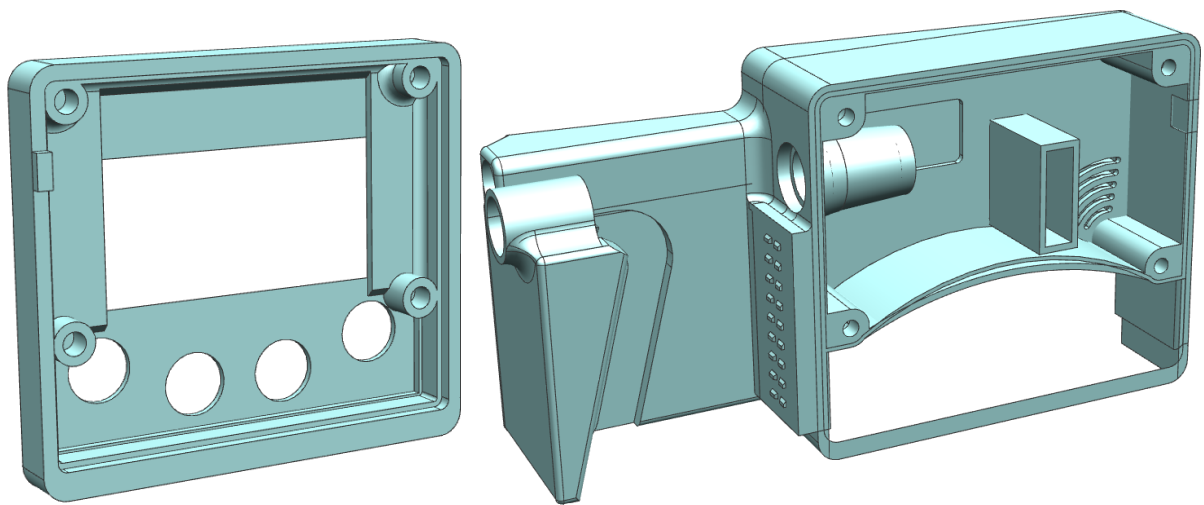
Front (left) and back (right) shells of the enclosure showing mounting posts for M2 brass inserts and component cut-outs.
